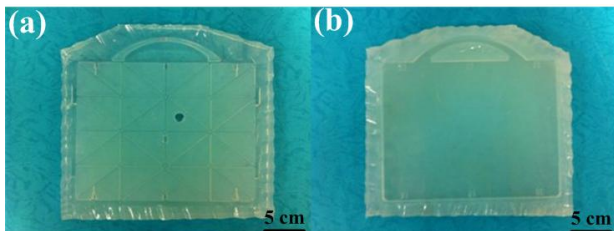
Silicone rubber mold of the modeling platform (a) core insert and (b) cavity insert
